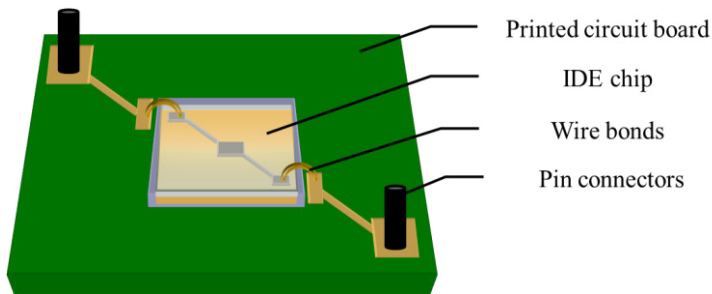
Schematic representation (not to scale) of the top-side view of the PDMS-coated IDE chip that is placed into the fitted milling hole and wire-bonded to the contact pads of the PCB.
